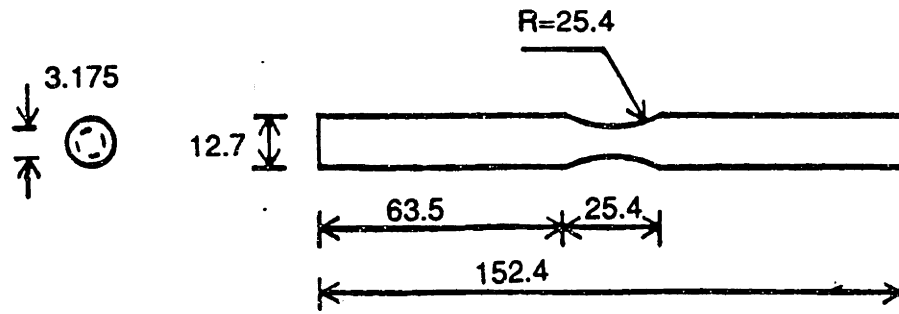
Sketch of the axisymmetric specimen used in the cold drawing of PC, all dimensions are in mm.
